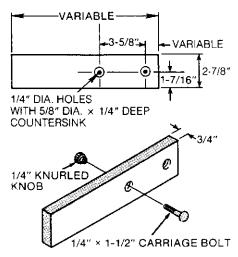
Dimensions and hole locations for a homemade miter gauge extension.
